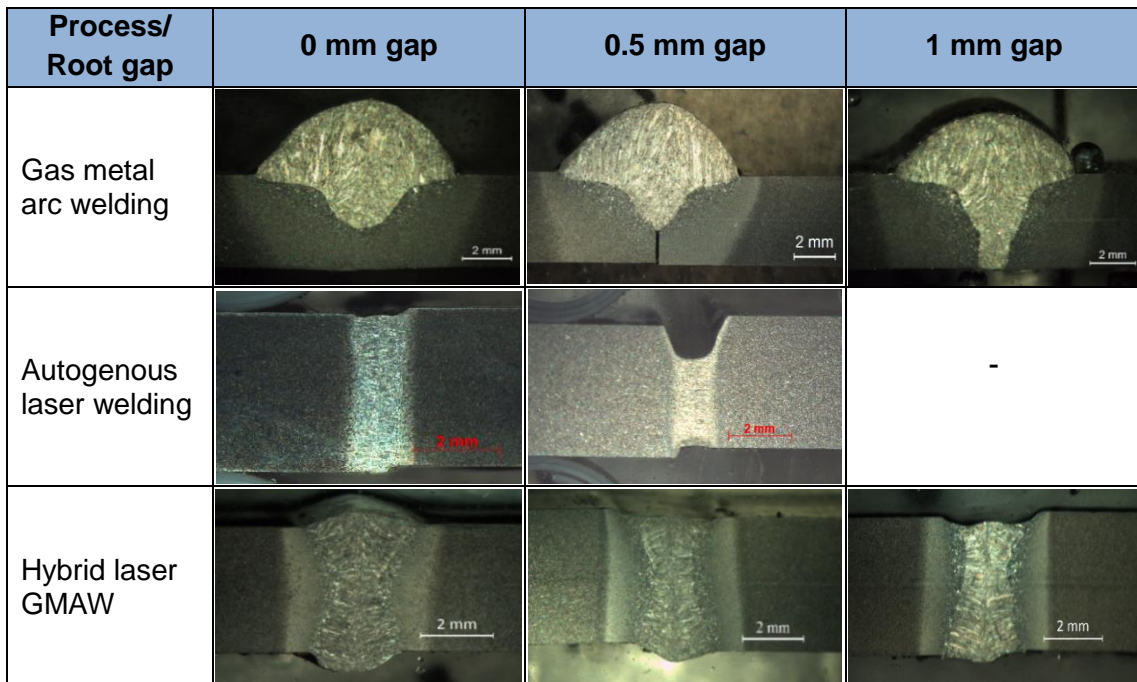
Weld cross-sections of different welding processes at different root gap conditions – 4 mm thickness
